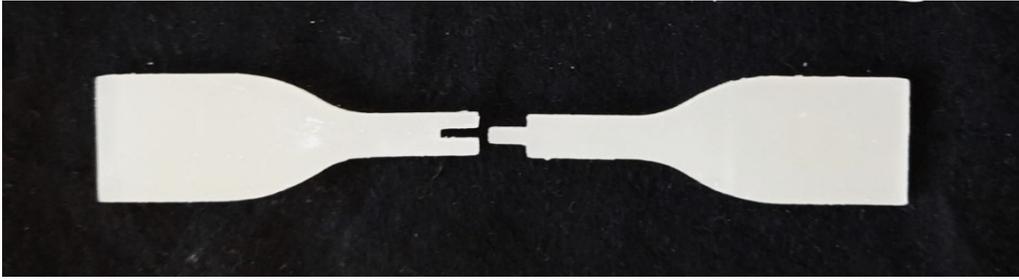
Toothed halves printed using FEMA 3D 25 to be assembled and tensile tested.
